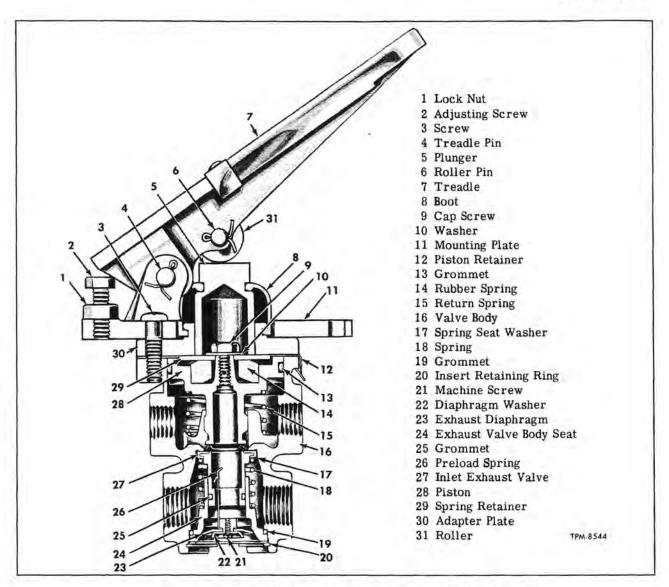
Brake Application Valve (Bendix-Westinghouse-Type E-2)
